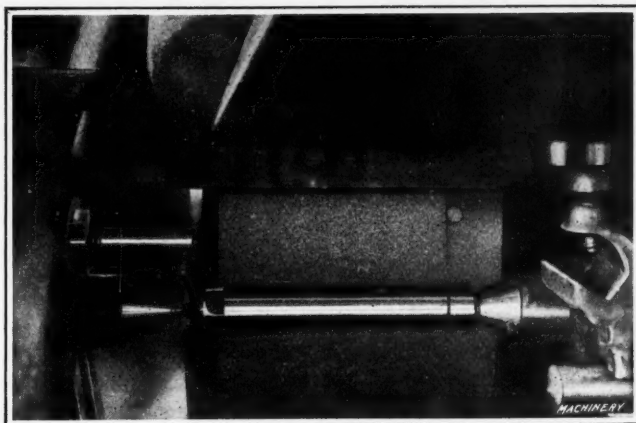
Set-up for grinding Idler Gear Shaft by Form Wheel Method—Note Method of Driving
